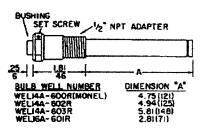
Bulb well for liquid immersion applications where a temperature bulb may be removed without draining tank.
